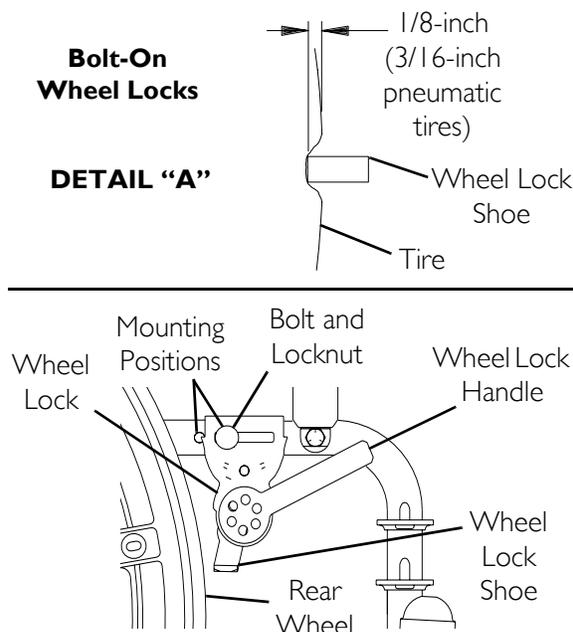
Adjusting Patient-Operated Wheel Locks
